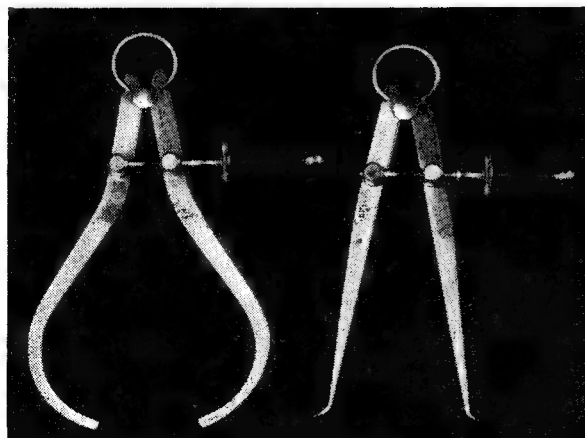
Left—outside thread calipers. Right—inside thread calipers
